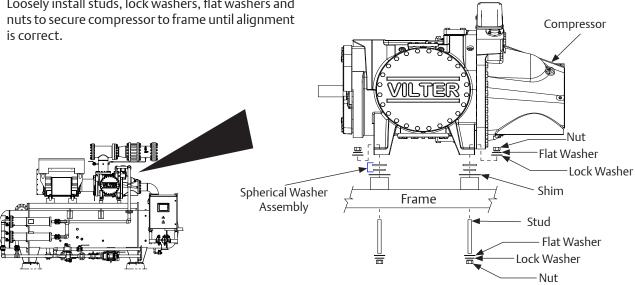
Compressor Replacement and Hardware Assembly (Models 2401-3001 Shown)
